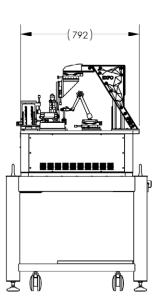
Technical drawing of the OPAL-MD-100 main system with dimensions in millimeters. Shown with one (1x) PRO-S-40 optical head, one (1x) PRE-00 manual electrical head, and one (1x) base frame. Not shown: included industrial rackmount PC and IT kit (monitor, keyboard, mouse). Also not shown: chiller and thermal chuck controller included with -TH1 option, as well as optical and electrical test equipment. Configuration non-final.
